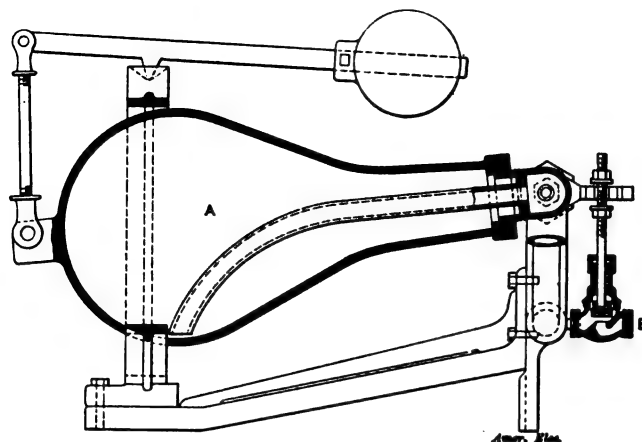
SECTIONAL VIEW OF "BUNDY" SEPARATING TRAP.
